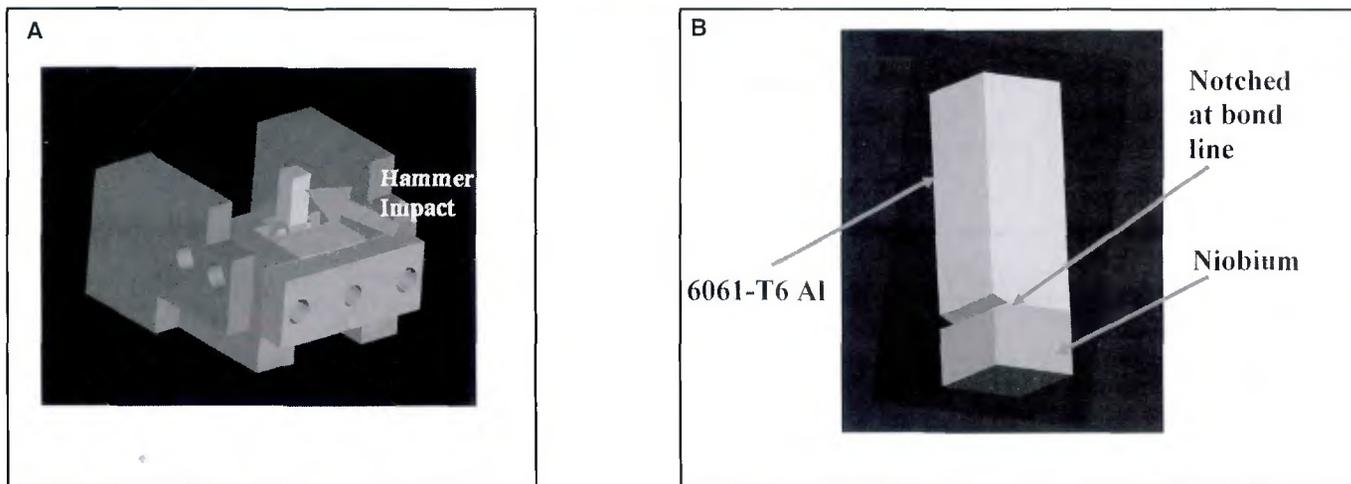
Schematic diagrams. A — The Izod impact testing setup used to measure the impact strength of the Al-Nb explosion weld; B — the modified Izod specimen.
